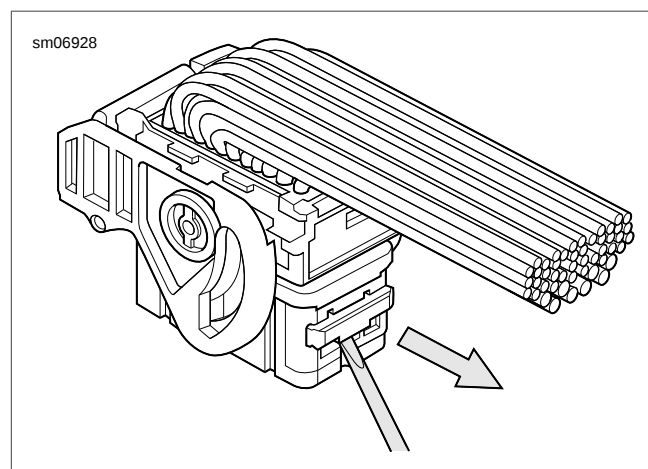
Molex CMC Sealed Connector Secondary Lock
